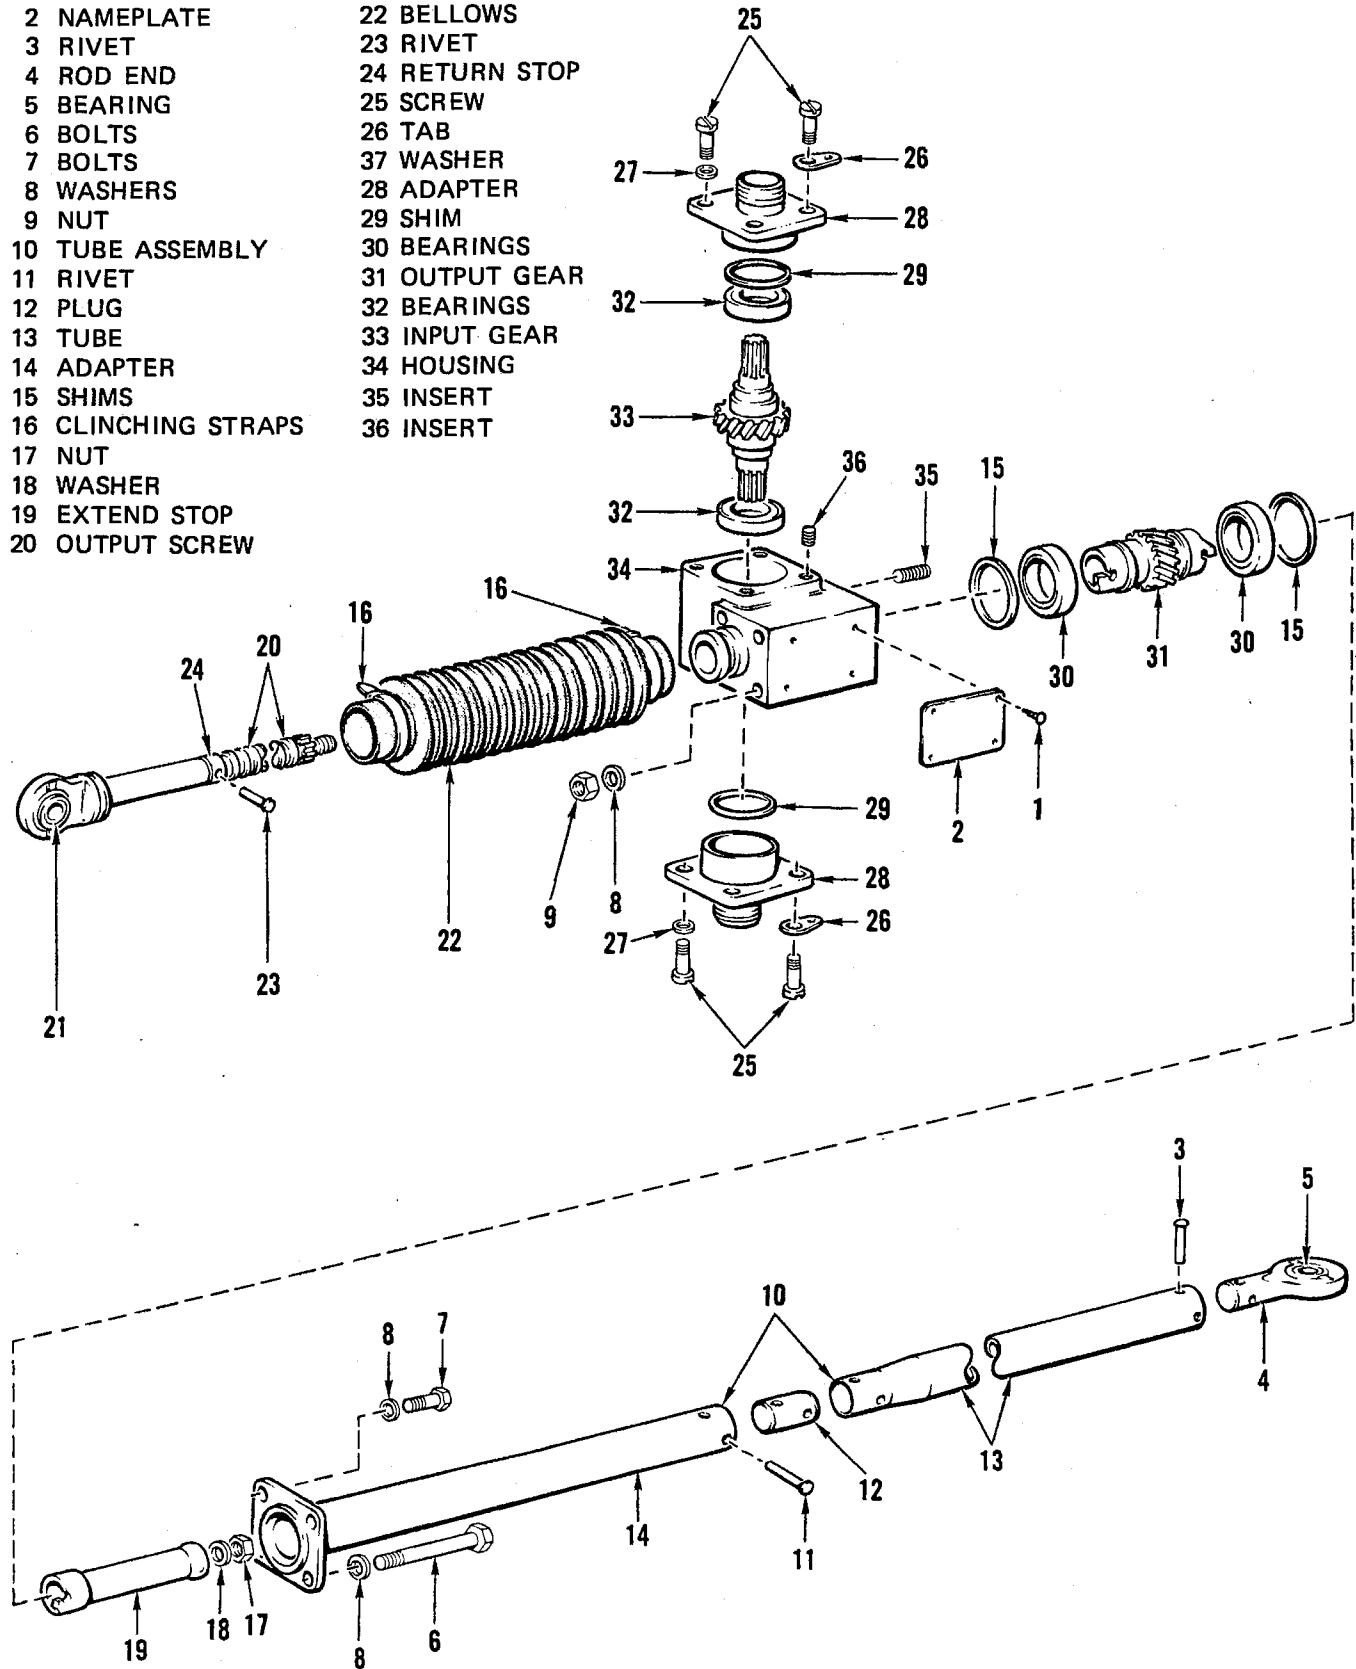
Rudder Pedal Adjust Screw-jack Assembly - Exploded View
